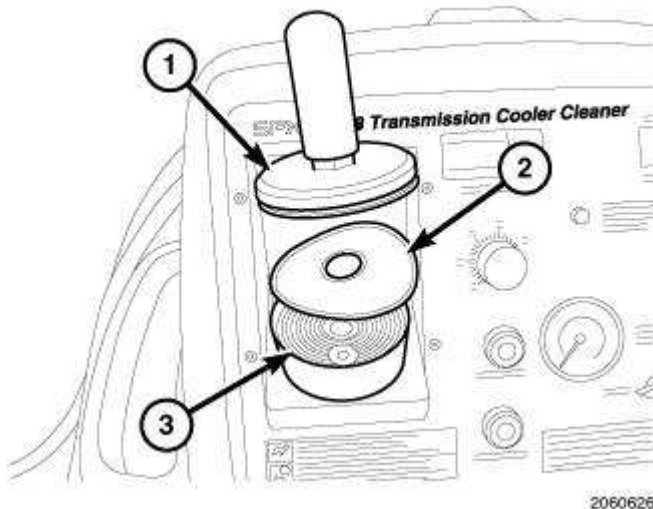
Identifying Trans Cooler Cleaner Filter Screen
